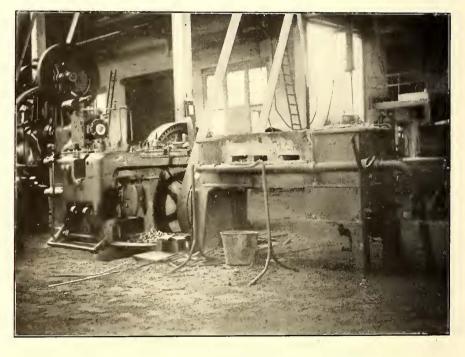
FORGING MACHINE FOR MAKING BOLTS AND RIVETS, WITH OIL FURNACE BESIDE IT
